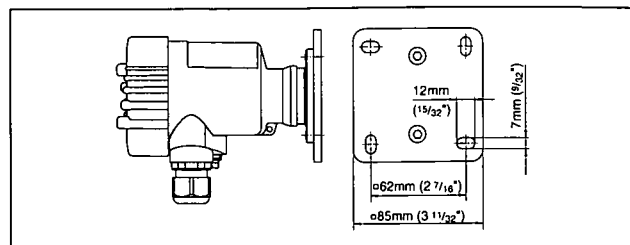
VEGADIS 61 for wall mounting, bottom view of mounting plate.
